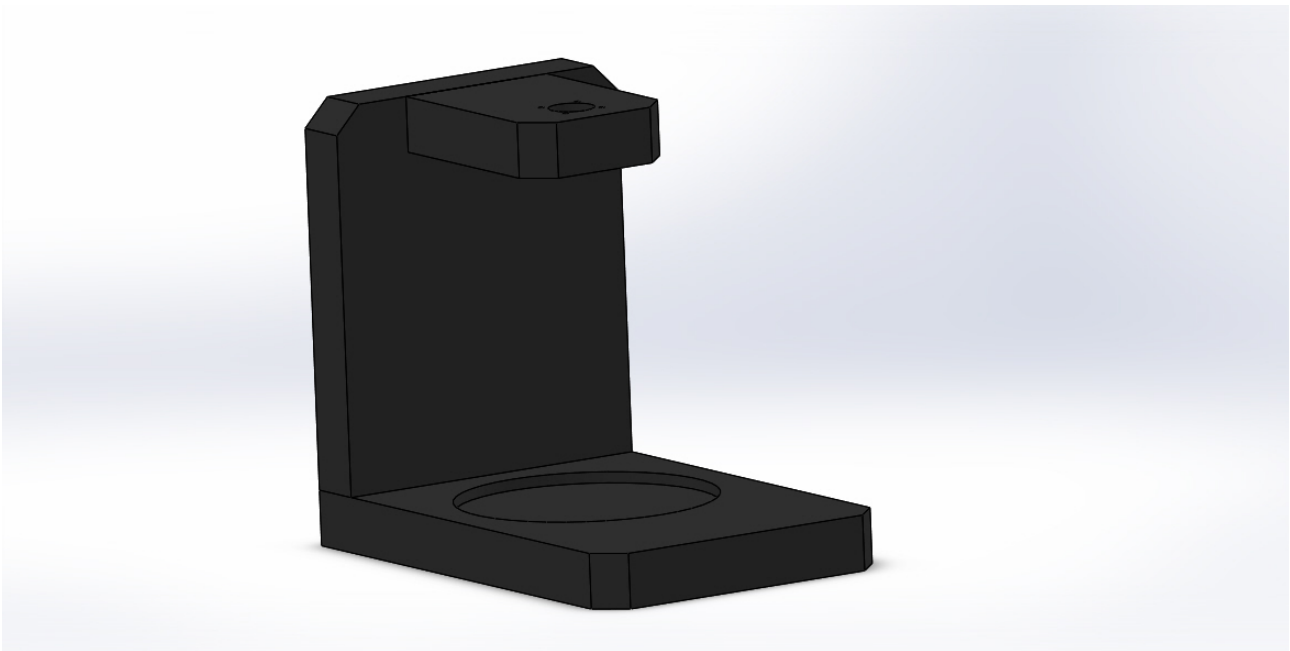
Solidwork 3-D model of compression bioreactor rig assembly used to place and hold parts.
